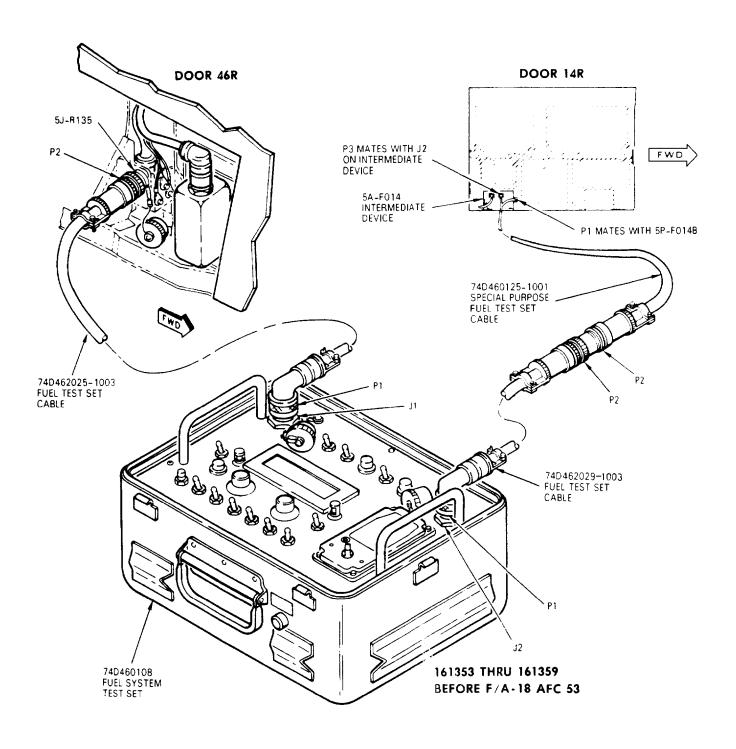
Fuel System Test Set Hookup (Sheet 1 of 5)
